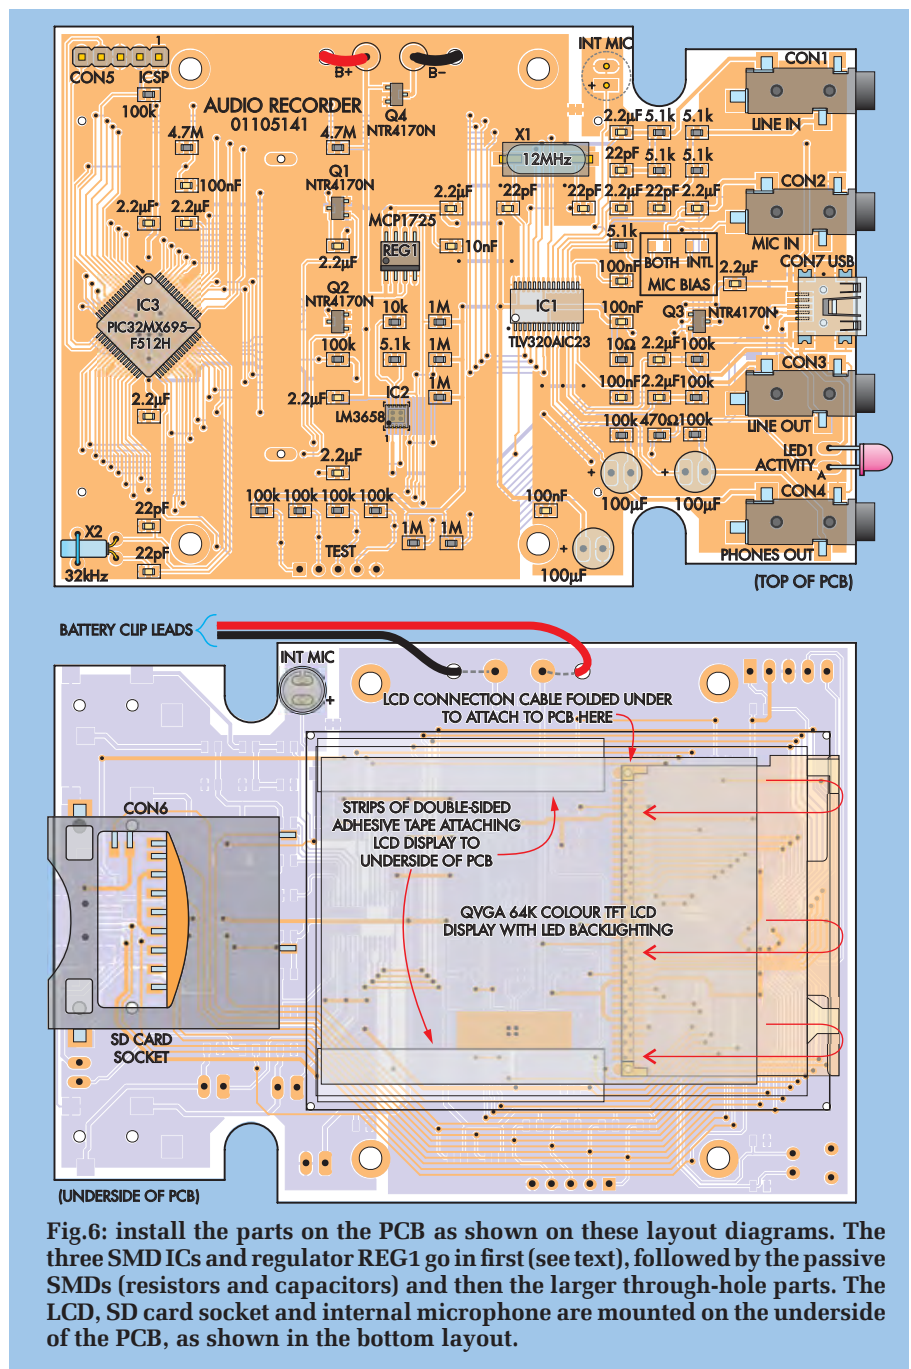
install the parts on the PCB as shown on these layout diagrams. The three SMD ICs and regulator REG1 go in first (see text), followed by the passive SMDs (resistors and capacitors) and then the larger through-hole parts. The LCD, SD card socket and internal microphone are mounted on the underside of the PCB, as shown in the bottom layout.
